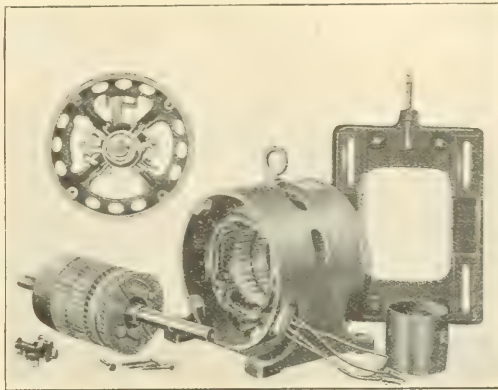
PARTS OF "CENTURY" MOTOR 2 H.P.
